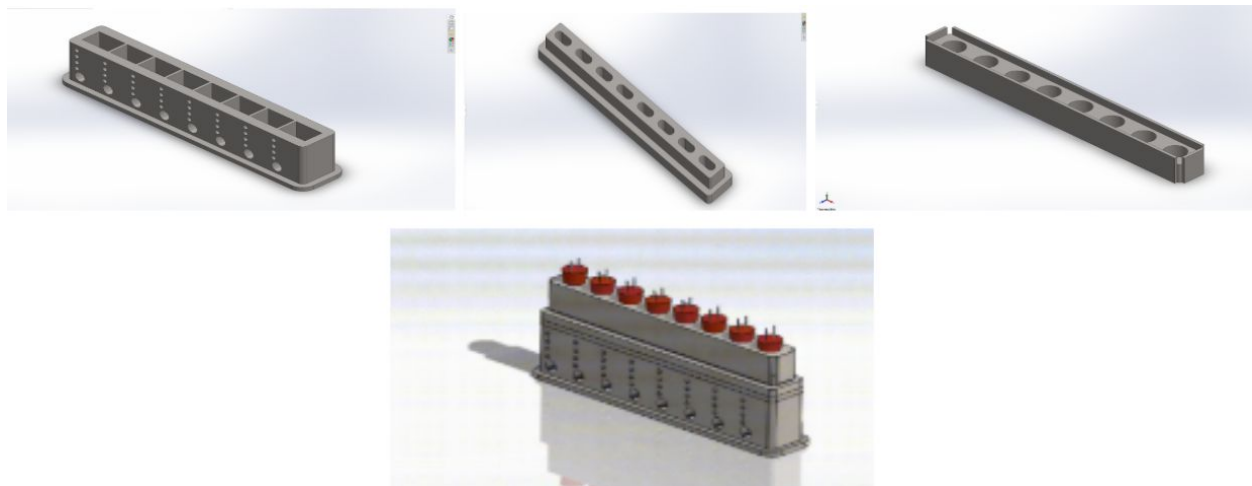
3D-printed parts. A) Air chamber base. B) 8-well plate well.
